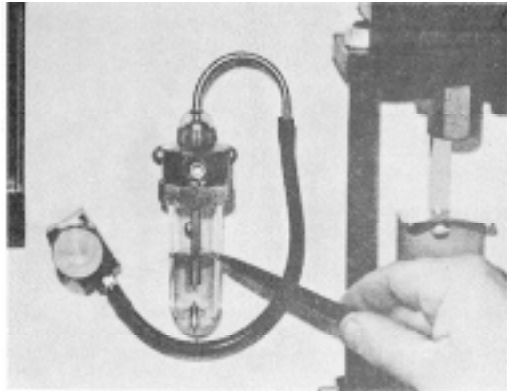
, F60169. Bubble check or bowl oil level
